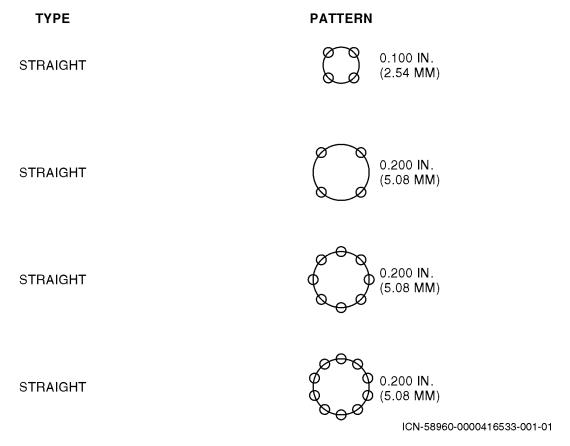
(Sheet 1 of 8) Lead Patterns and Dimensions
